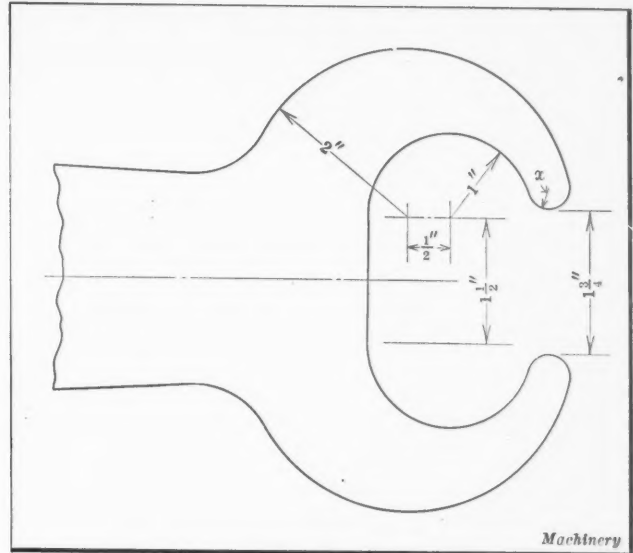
Stamping for which Blanking Die is to be built, Radius x being unknown
